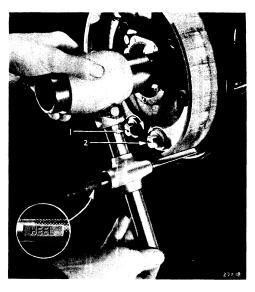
Checking Heel Adjustment (Items 1 and 2 are Anchor Bolts)
